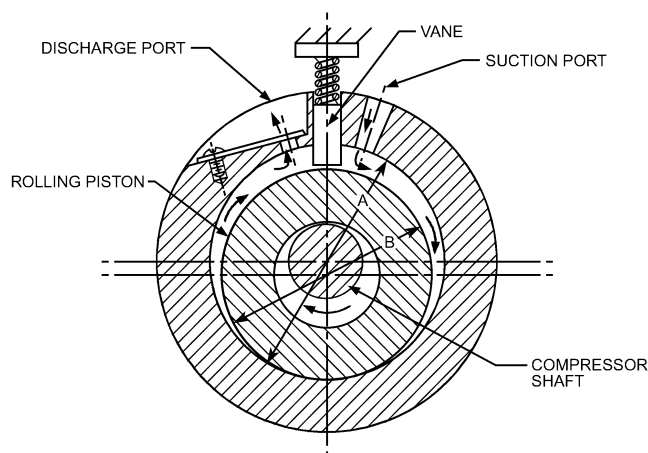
Fixed-Vane Rolling Piston Rotary Compressor
